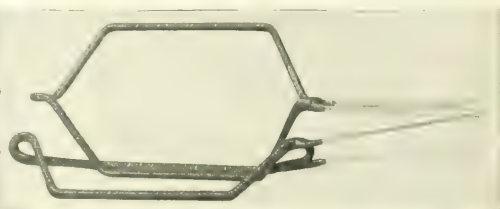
COMPLETED DIAMOND COILS READY FOR MACHINE WINDING
